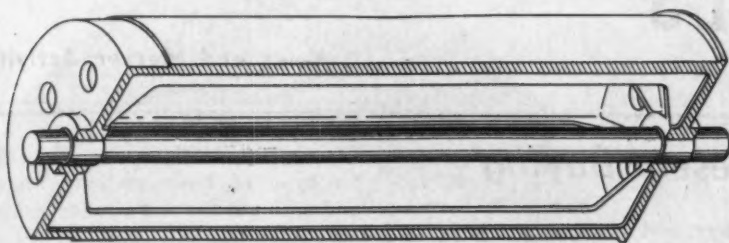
Typical design of cast iron hoist drum. Separate shaft machined separately.
